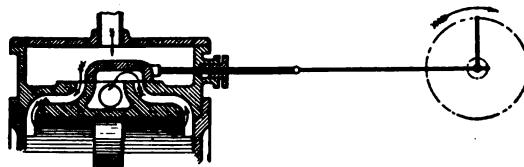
Elementary Slide Valve—Inlet and Exhaust Ports Fully Opened—Piston in Mid-Position
